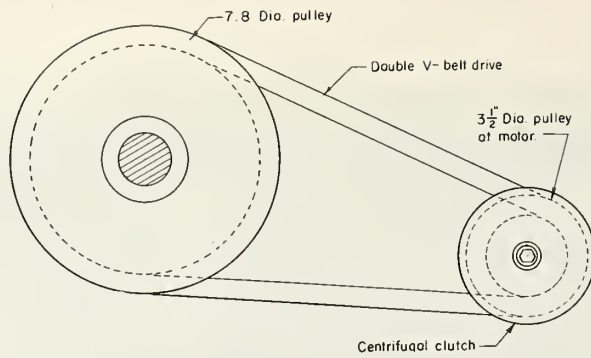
Centrifugal clutch and V belts which replace chain drive.
